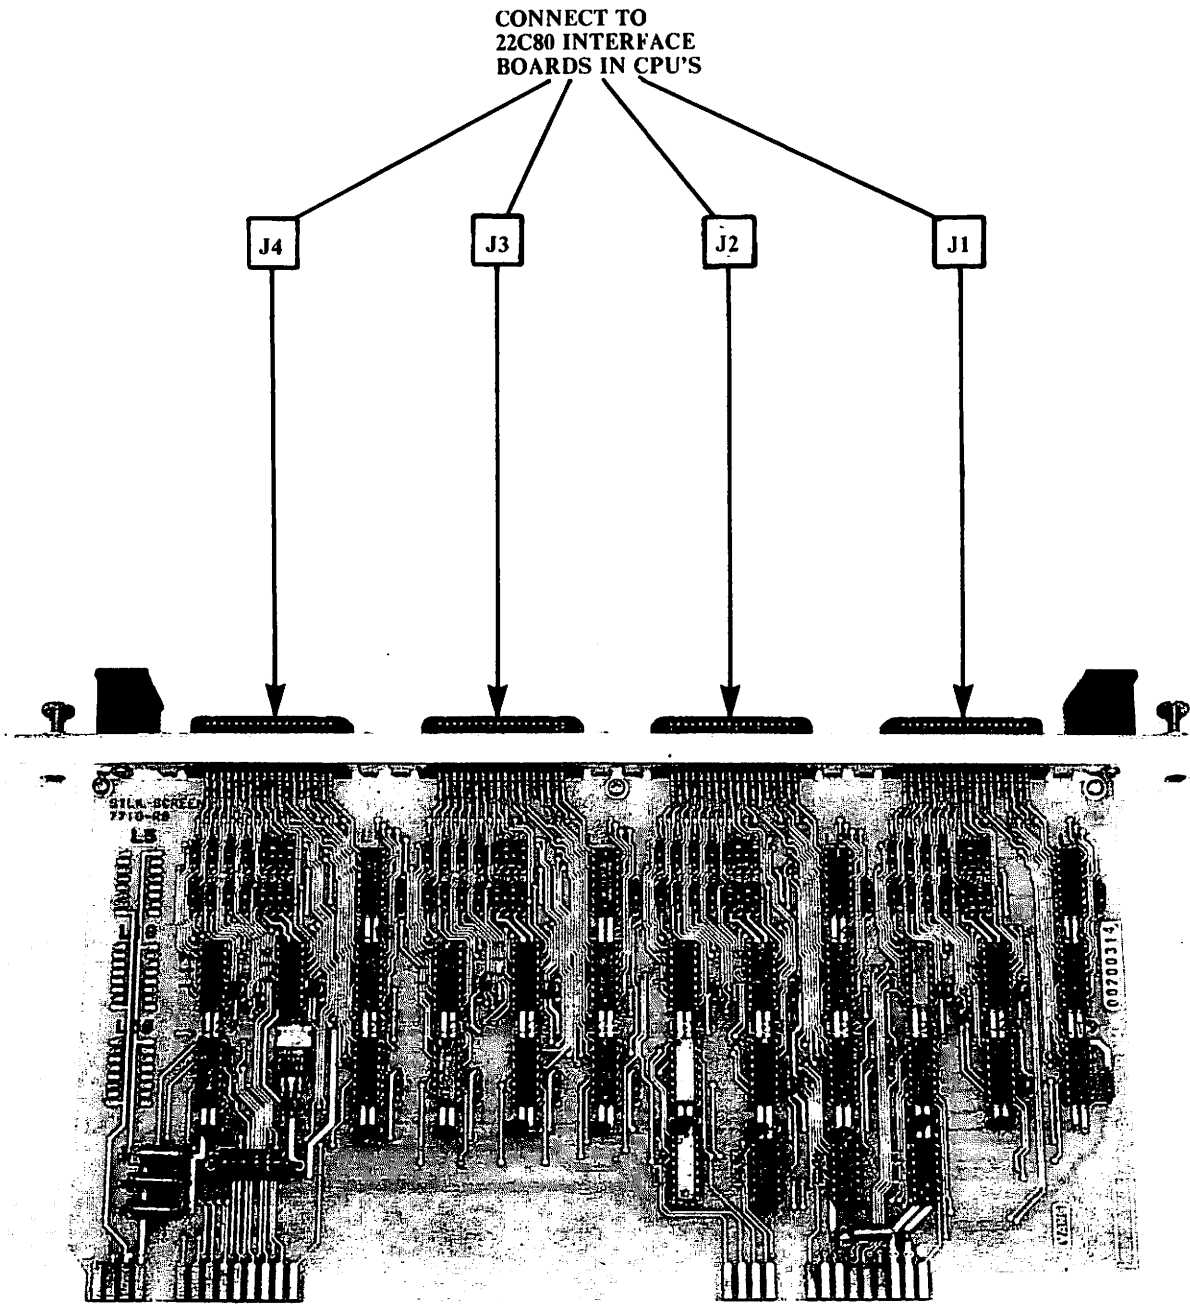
WL NO. 210-7718 PORT EXPANDER BOARD
